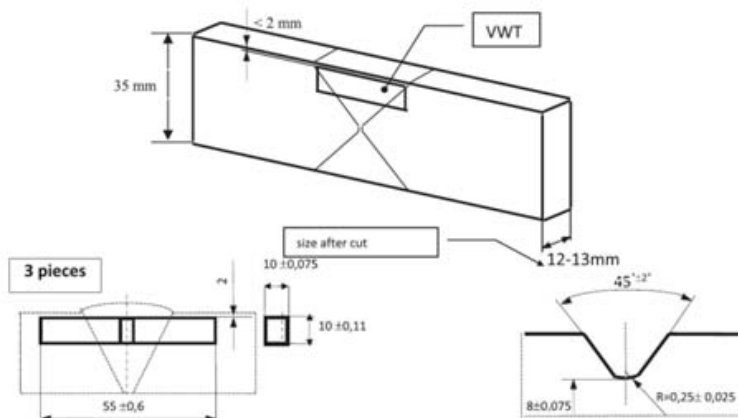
A way of preparing samples taken from the weld to the impact strength tests [14]
